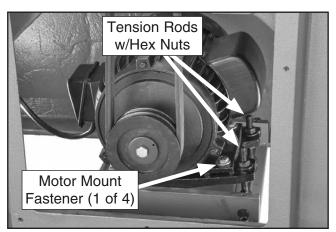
Location of motor tension rods, hex nuts, and motor mount fasteners.
